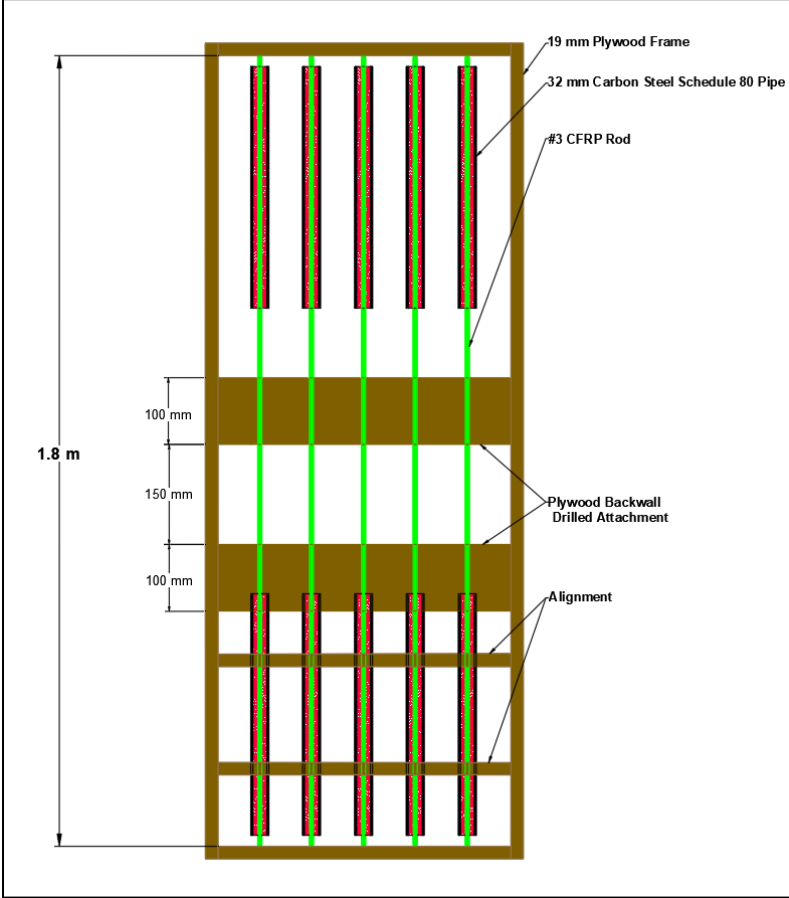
Jig for Aligning ASTM Specimens and Anchors
